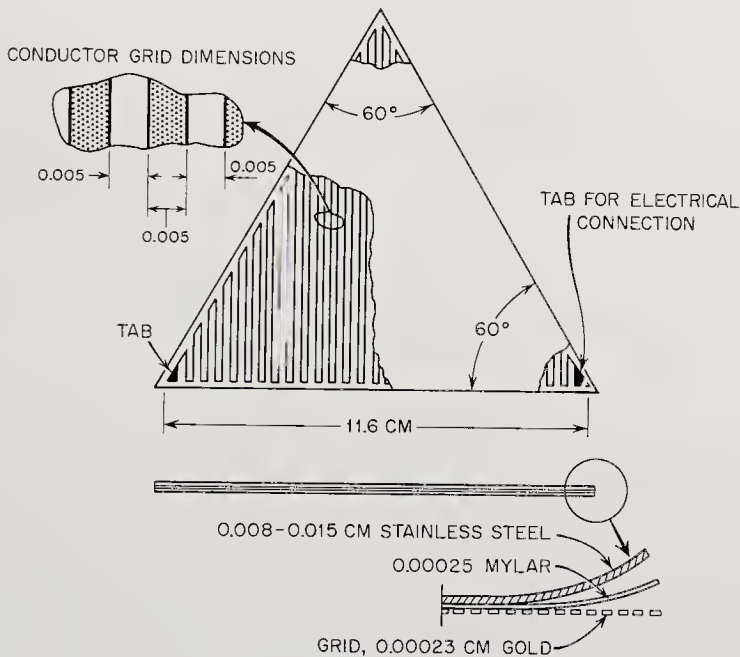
Wire-grid detectors carried on Explorer 16. (Ref. 13-27)
